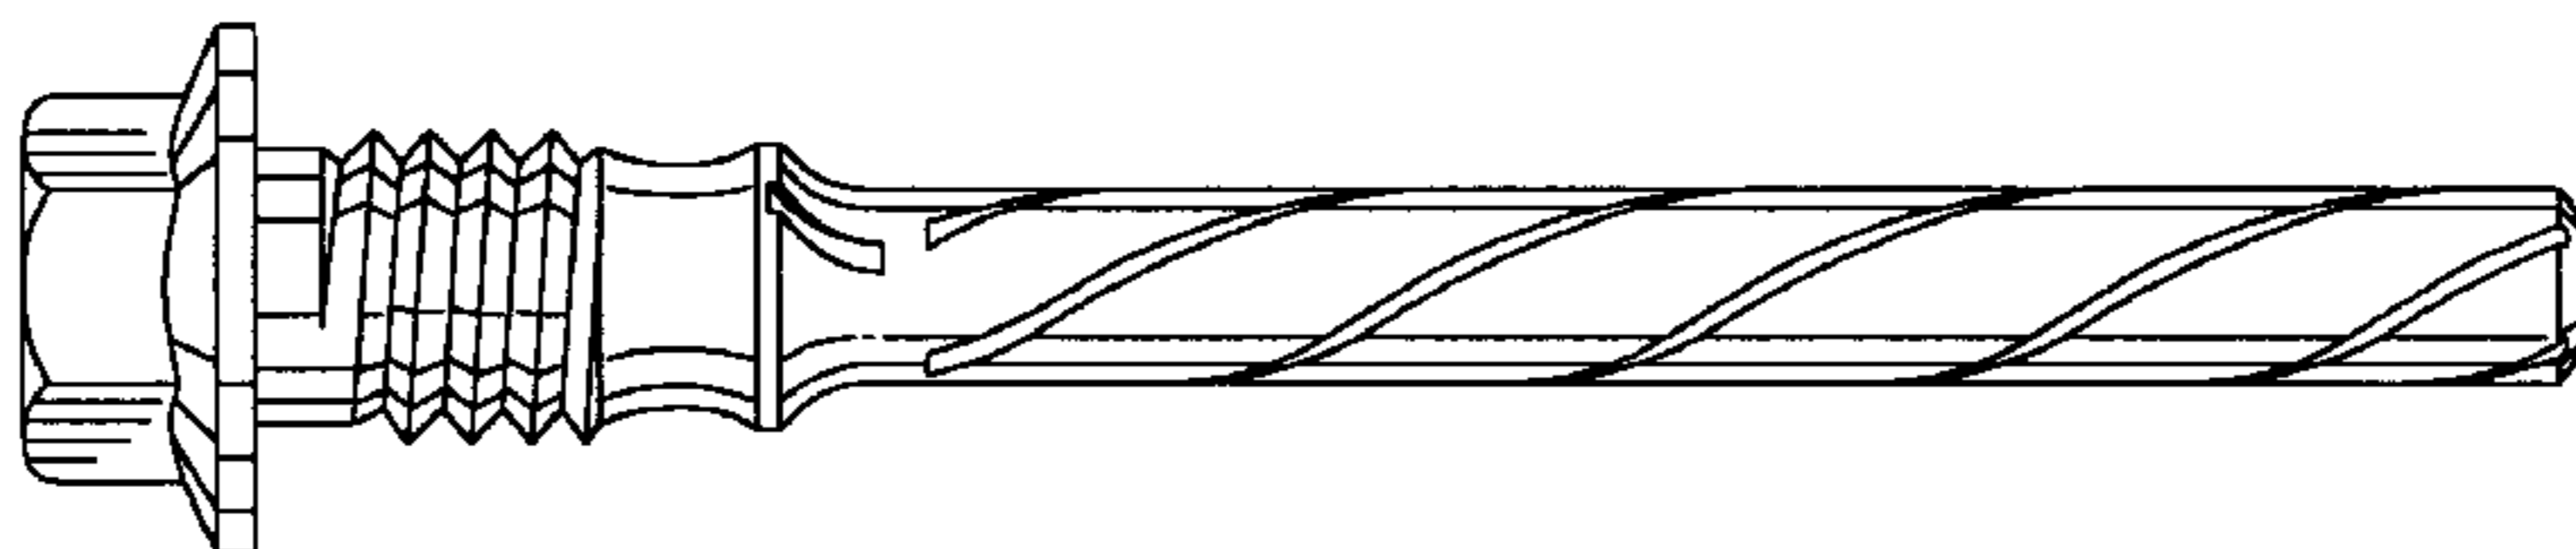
is a front view of the first embodiment of the brake pin showing the new design;
